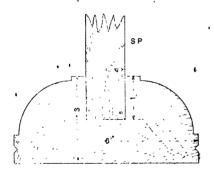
Section of Bottom Stand and Sidepiece of Portable Desk.
